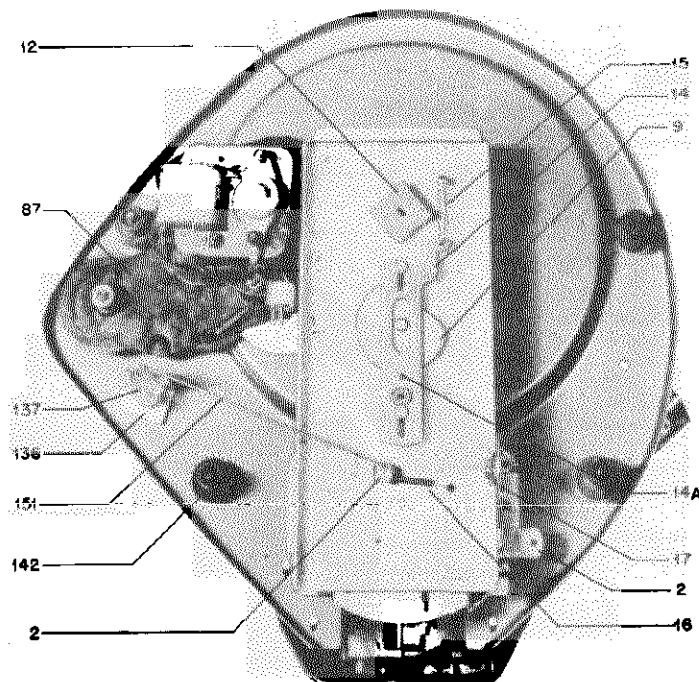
BOTTOM VIEW OF RECORD CHANGER
